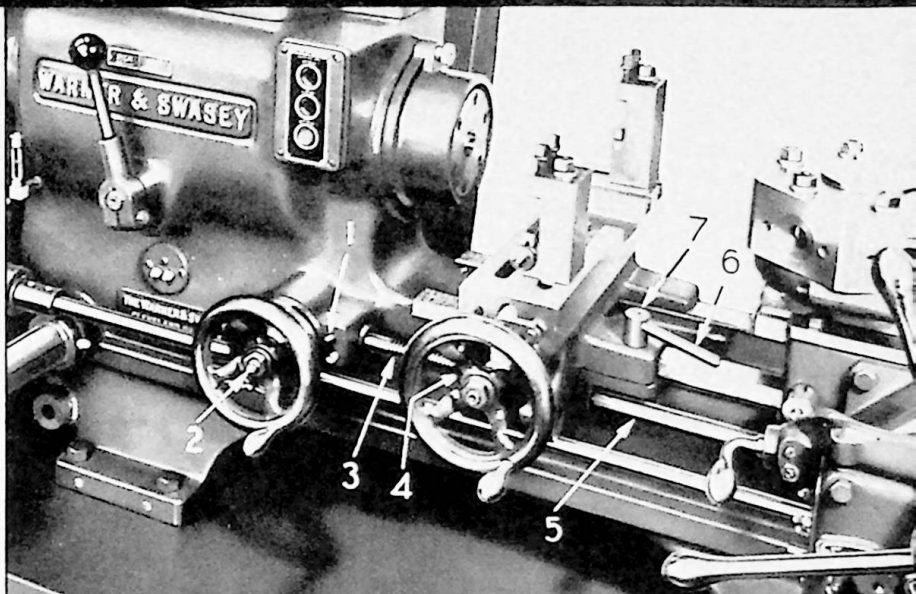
Cross Slide and Hand Longitudinal Units for No. 2 Machines.
